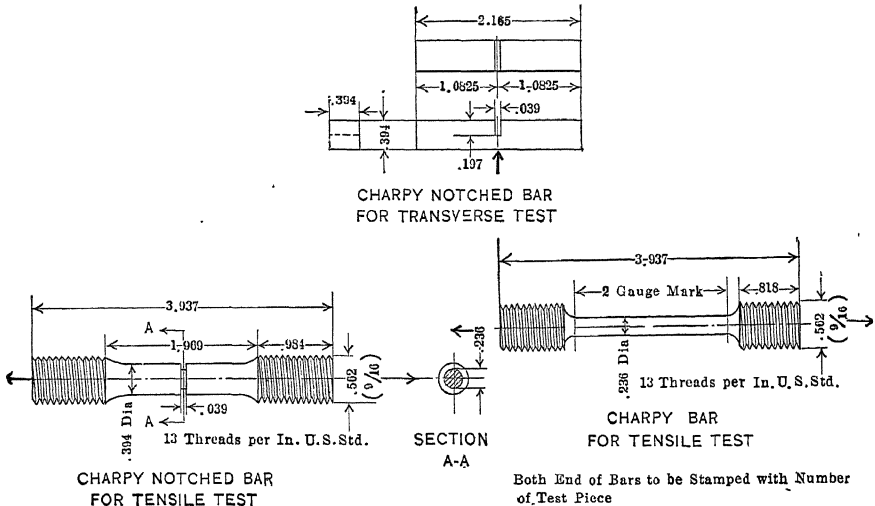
FORMS OF CHARPY TEST SPECIMENS.
